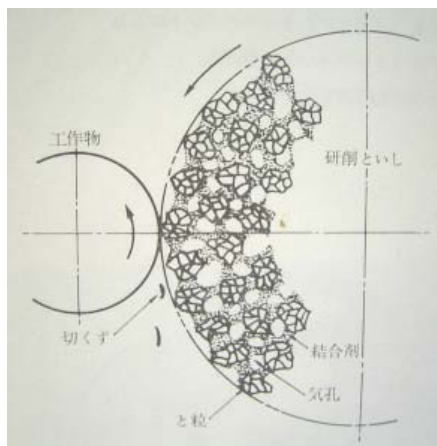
Structure of Grinding tools⁶⁻²⁾
